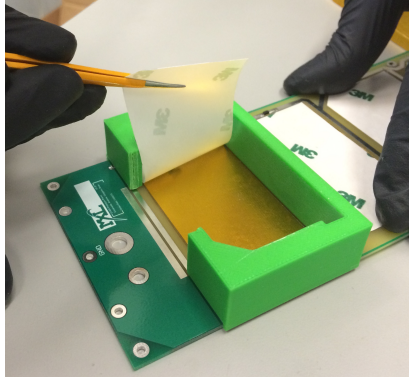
Using Kapton-tape and alignment jig to adhere cells to PCB.
